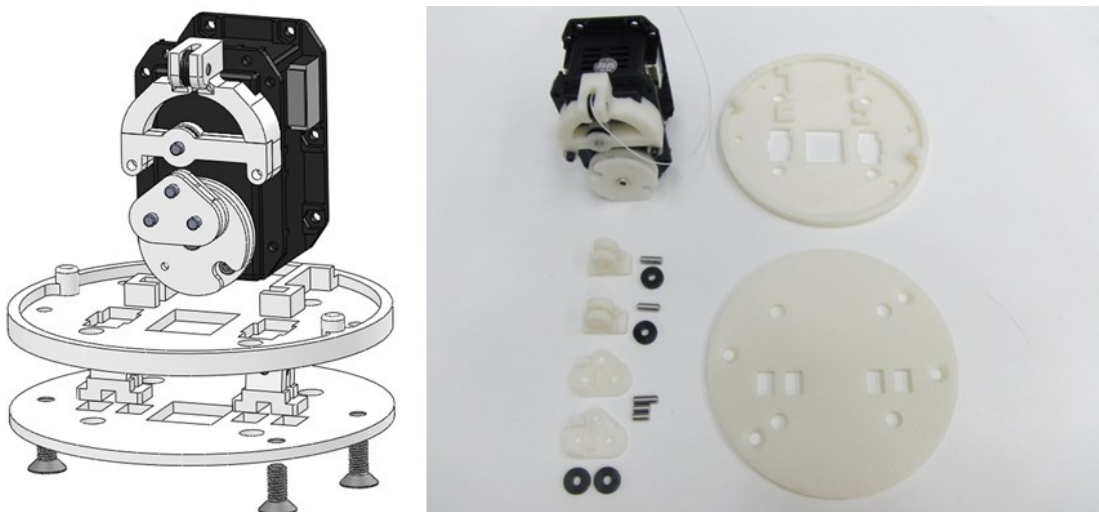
Components and assembly of bottom base block, with the actuator block
